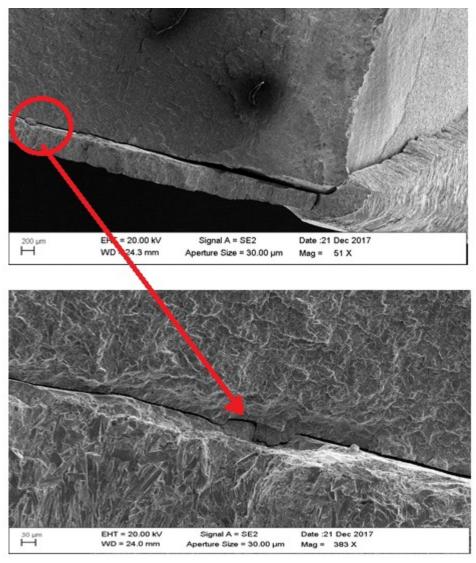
Specimen No. 5, de-bonding in fracture surface.
